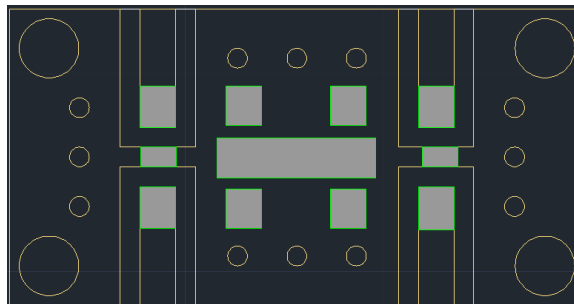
Applying the Solder Paste to the 11 Points on the PCB Surface
